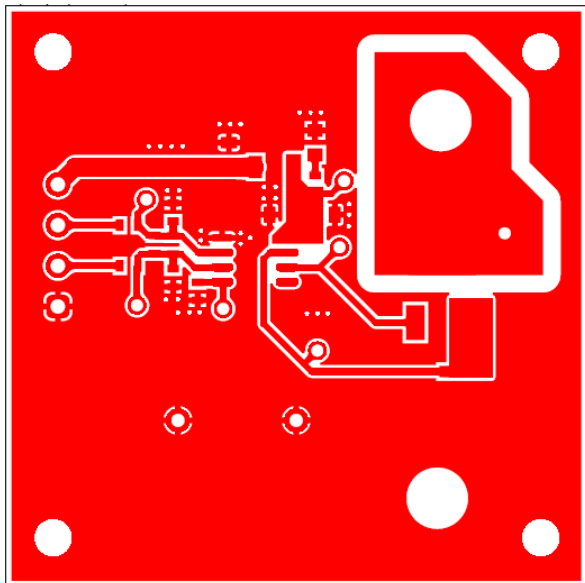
FAD1110EVB PCB Internal Plane 1 Drawing
